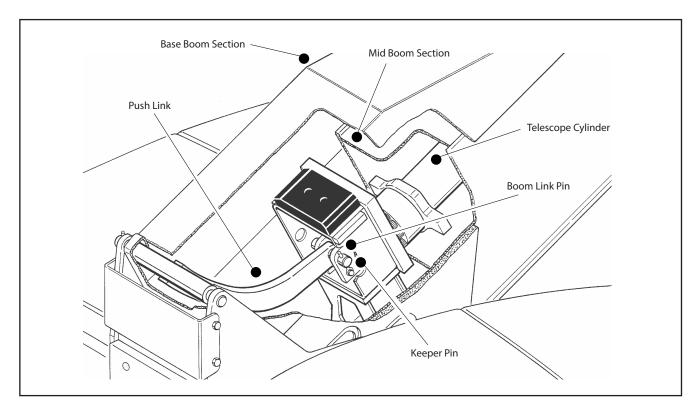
Boom Assembly Cutaway - Sheet 3 of 3
